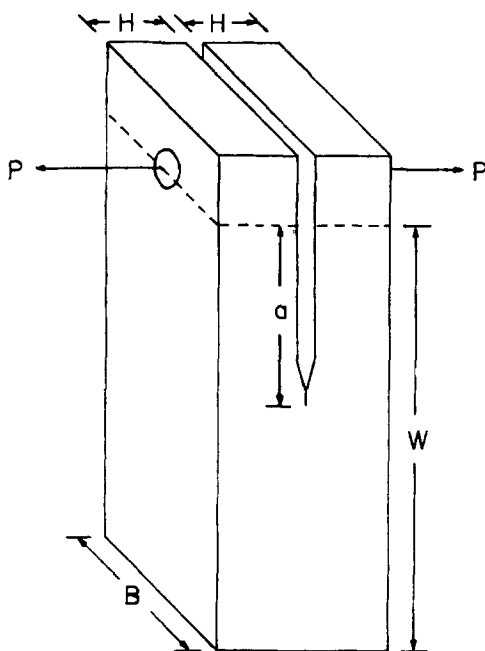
Specimen geometry of double cantilever beam (DCB) specimen.
